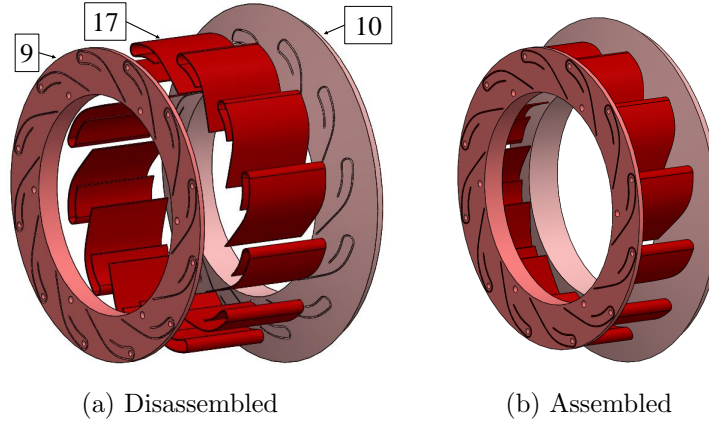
shows how each part of the Disk-Oriented Engine disassembles into its individual parts. This helps to make sense of the assembly process, as there are multiple sections that would function as one solid piece if machining such a design would be possible. For example, the turbine stator section (Parts 9, 10, and 17) were welded together as one piece of Inconel, but had to be cut as different pieces. Figure 52 shows how the cane-shaped stators fit into the surrounding plates to be welded into place.
